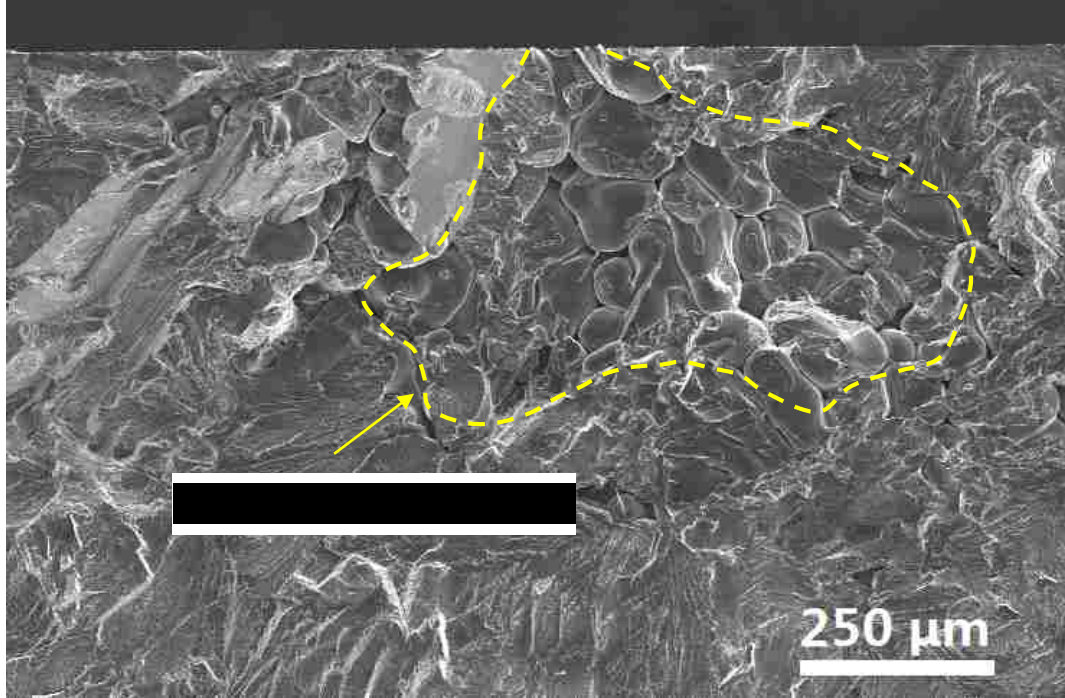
Fracture surface of the fatigued A713 sample.
